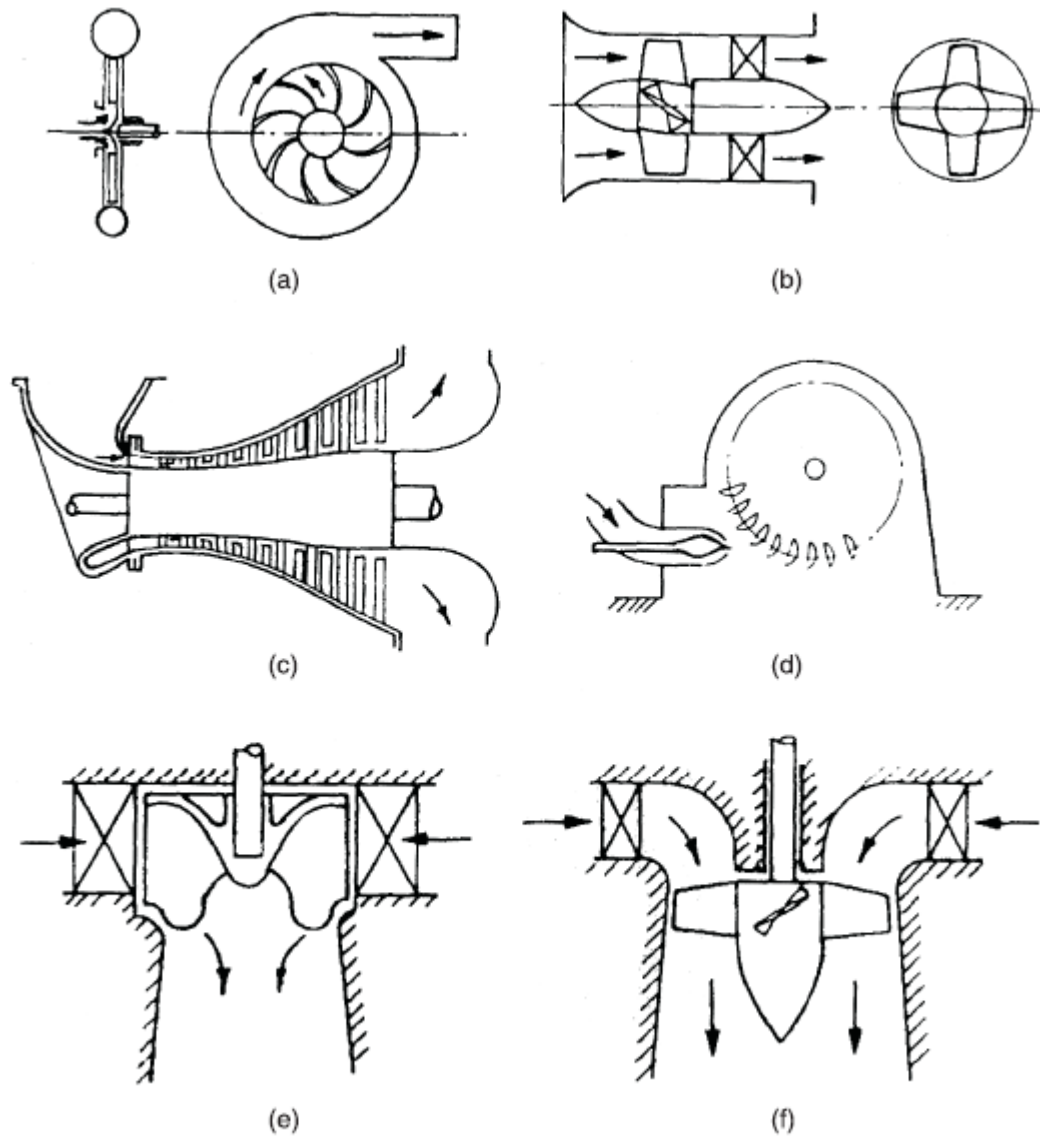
Types of turbomachines: (a) Centrifugal pump. (b) Axial flow pump. (c) Steam turbine. (d) Pelton wheel. (e) Francis turbine. (f) Kaplan turbine.
